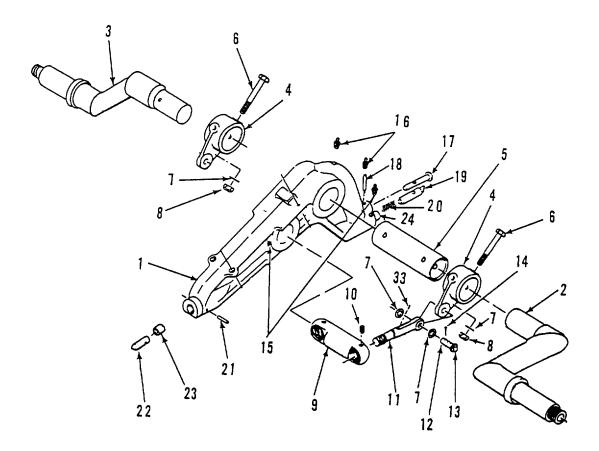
Cradle Assembly, P/N 1730-UH-1001
